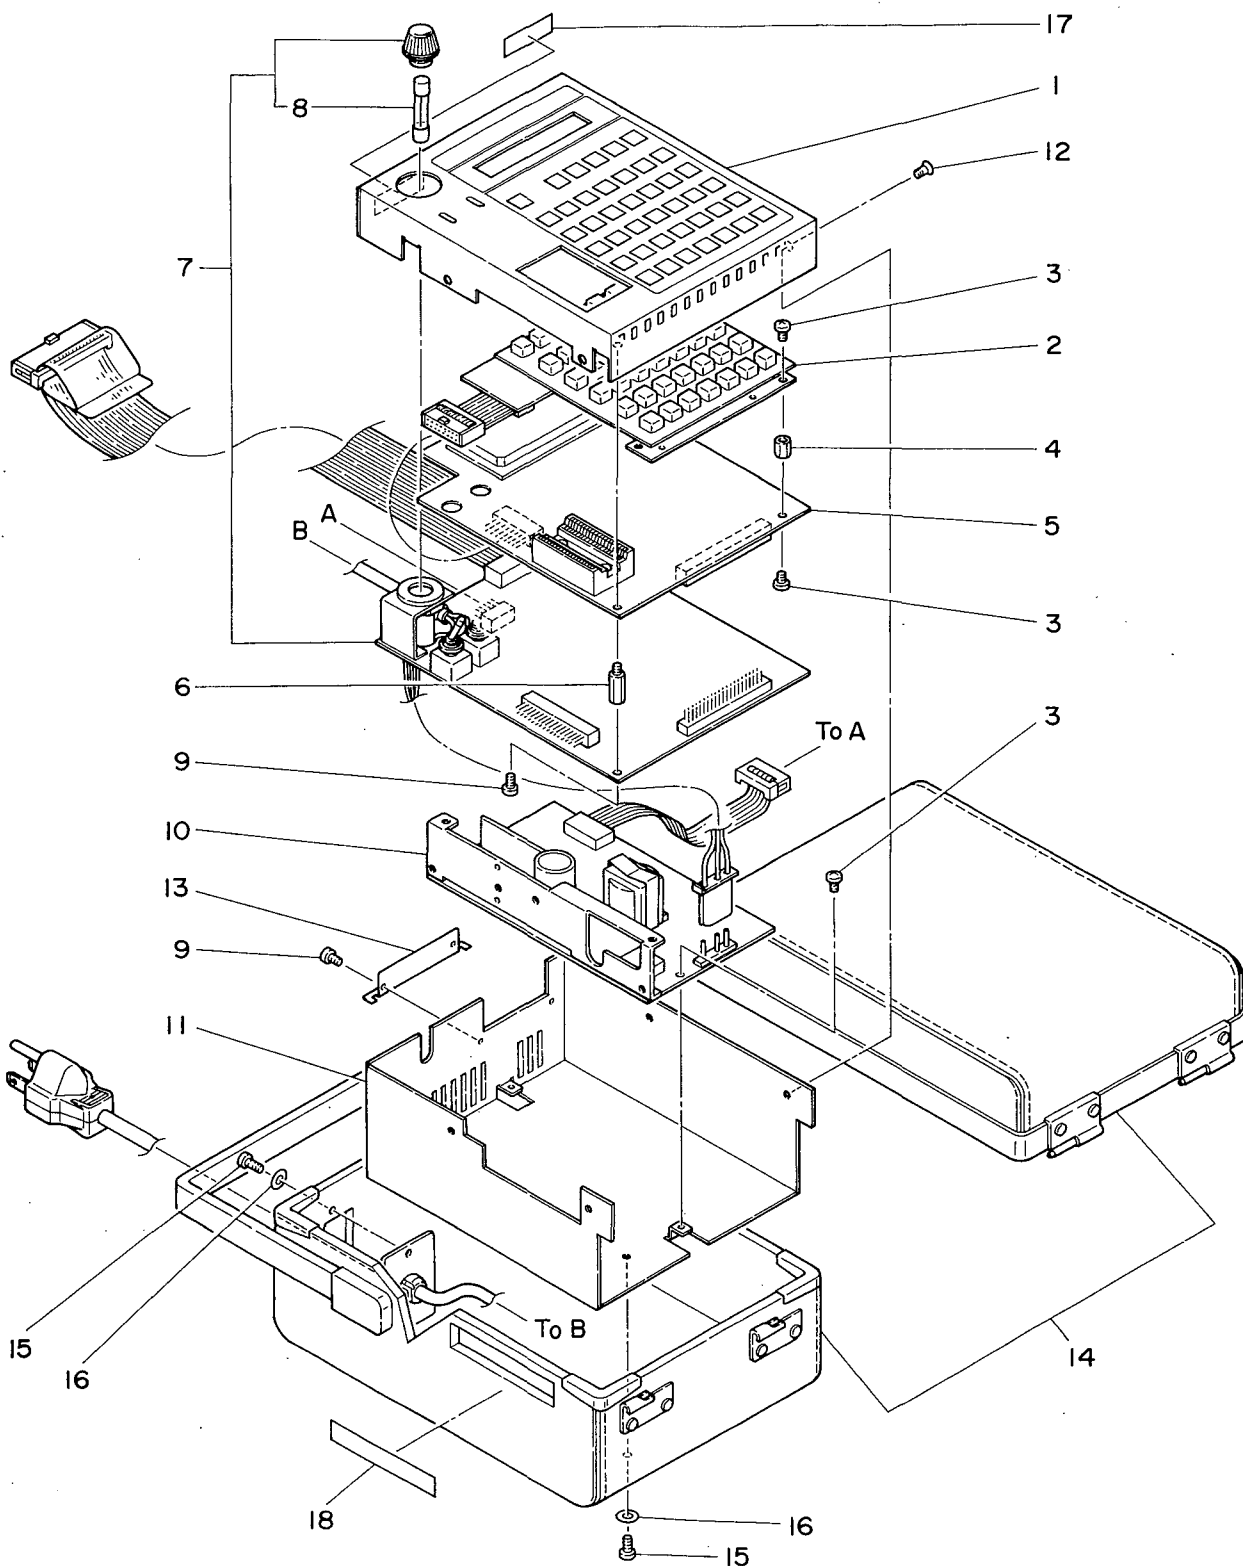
Model SPRG Programmer Disassembly Drawing. - 2.
